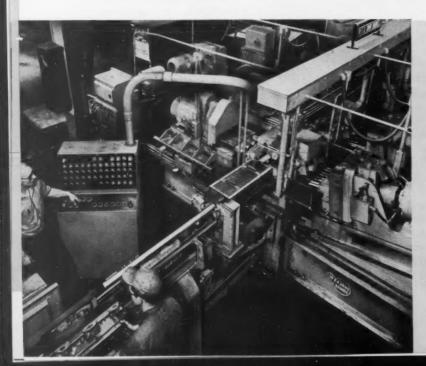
(Left) Valve guide holes, throats, and generator seat are bored; and fifty-six holes are spotfaced, drilled, reamed, or burnished on this multiple station machine.
